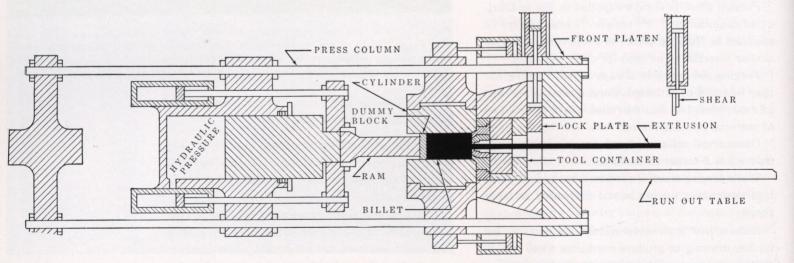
This is a typical extrusion press used for producing aluminum shapes. The hydraulically operated ram pushes the hot aluminum billet through the die opening which has the desired cross section. A typical set of extrusion tools is shown in detail in Figure 3-6.
